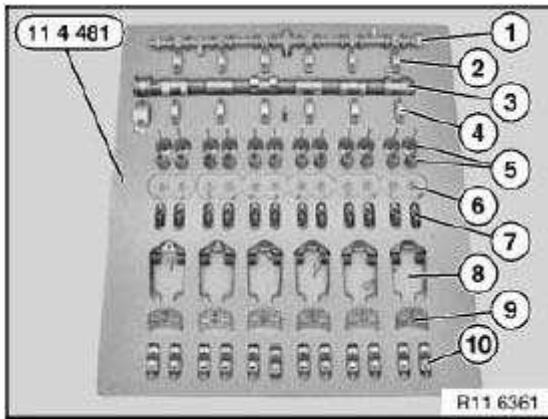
Torsion Springs, Inlet Camshaft, Guide Blocks And Special Tools (11 4 481)
